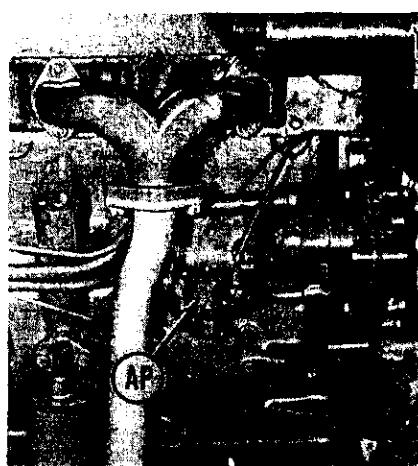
View of B-275 tractor showing the auxiliary fuel pump (AP) used when tractor is equipped with an injection pump having a mechanical governor. B-414, 354, 364 and 384 tractors are similar.
